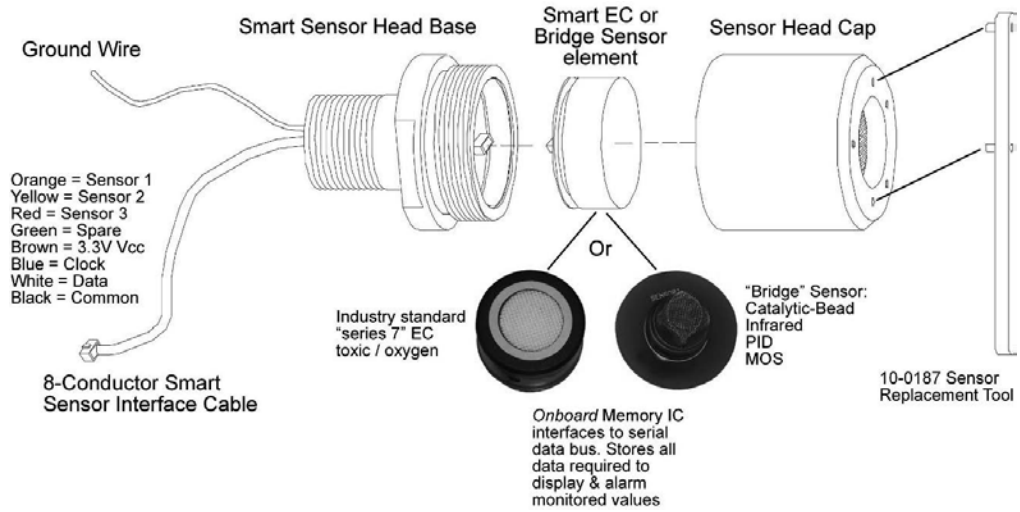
BFT10-0247 Smart Sensor Head Assembly
